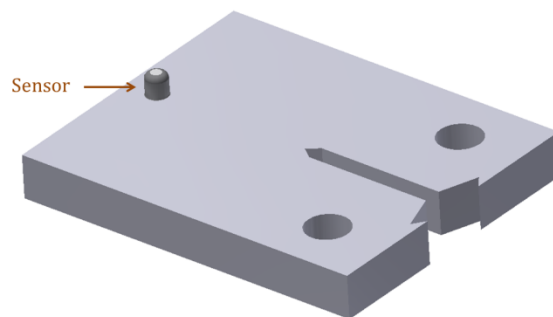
Sample with wire cut perpendicular to the loading direction and the sensor location
